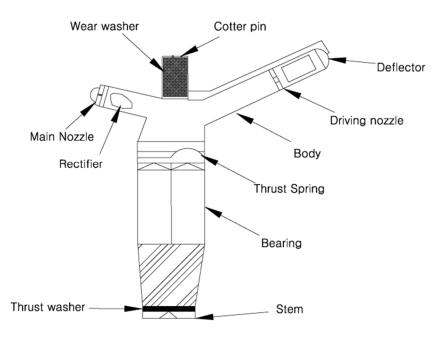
Details of a Twin-Nozzle Rotating Sprinkler Head.
